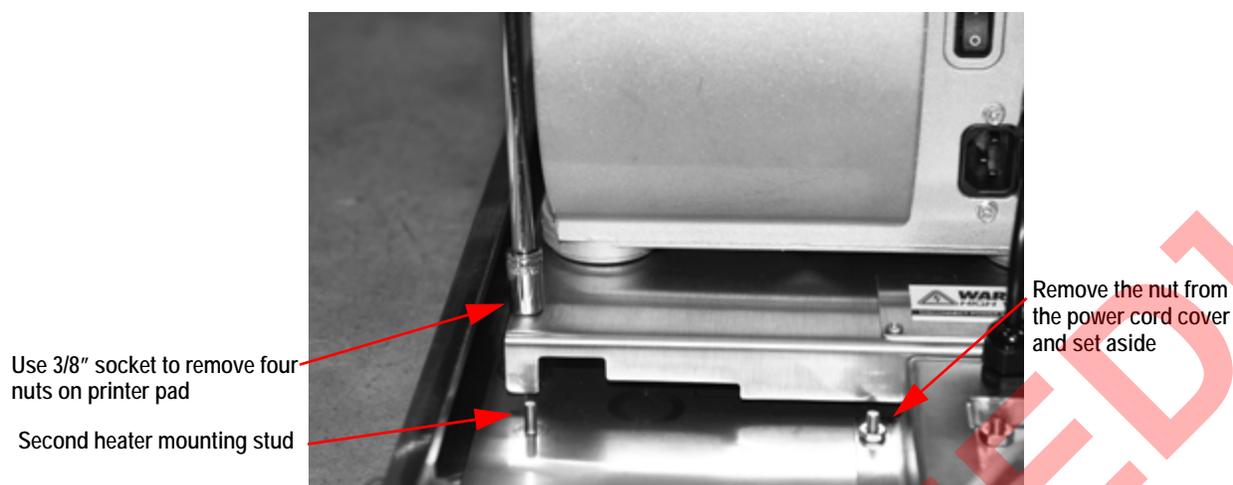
Unscrew Four Nuts Holding Printer Pad to Printer Base Plate
